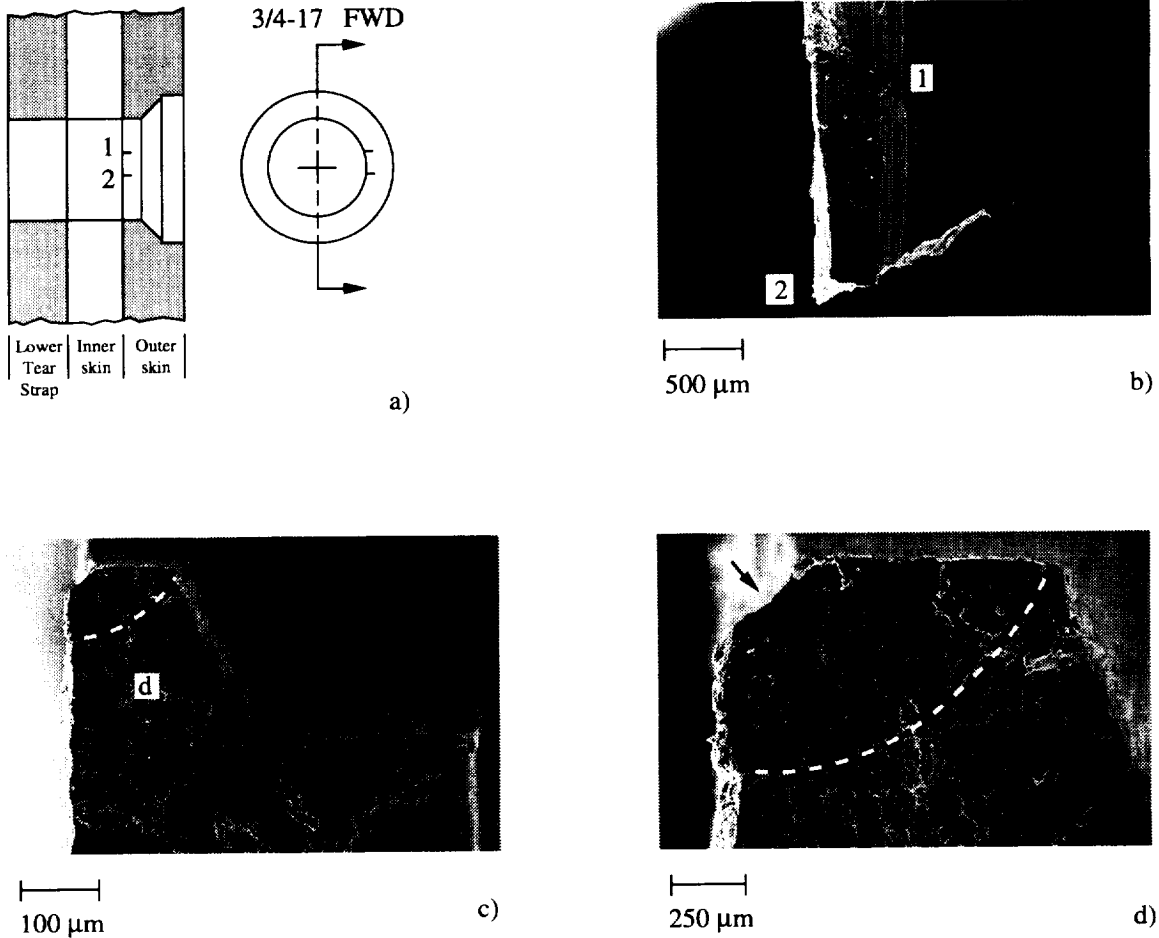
a) The schematic shows the rivet hole 3/4-17 configuration and the location of two outer skin fatigue cracks oriented in the forward direction and about the 3 o'clock position. b) The SEM micrograph shows the inside surface of the outer skin rivet hole. Fatigue crack #1 is partially opened along the shank region of the rivet hole and crack #2 is located on the main fracture surface. c) The SEM micrograph shows fatigue crack #2 located in the shank region of the rivet hole. The dashed line marks the fatigue crack front. d) The SEM micrograph shows the fatigue crack #2 located at region "d" in Figure 10.19.c at high magnification. The arrow marks the likely site of crack initiation at the inboard corner of the rivet hole and the dashed line marks the fatigue crack front.
